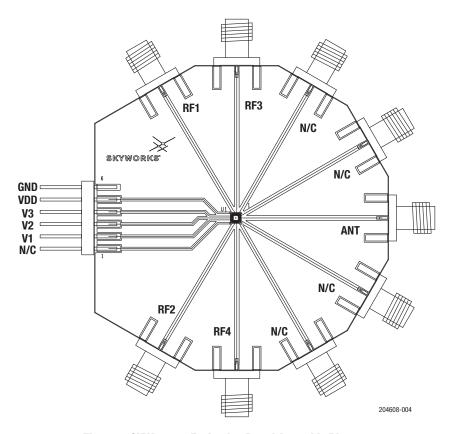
SKYA21029 Evaluation Board Assembly Diagram
